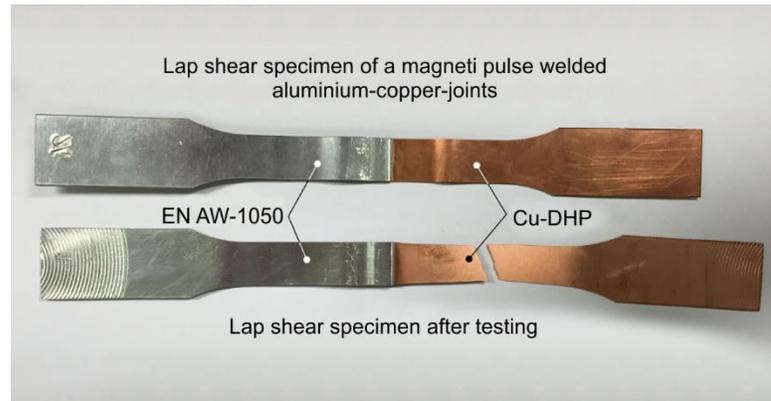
Lap shear test of magnetic pulse welded copper aluminium hybrid sheets
